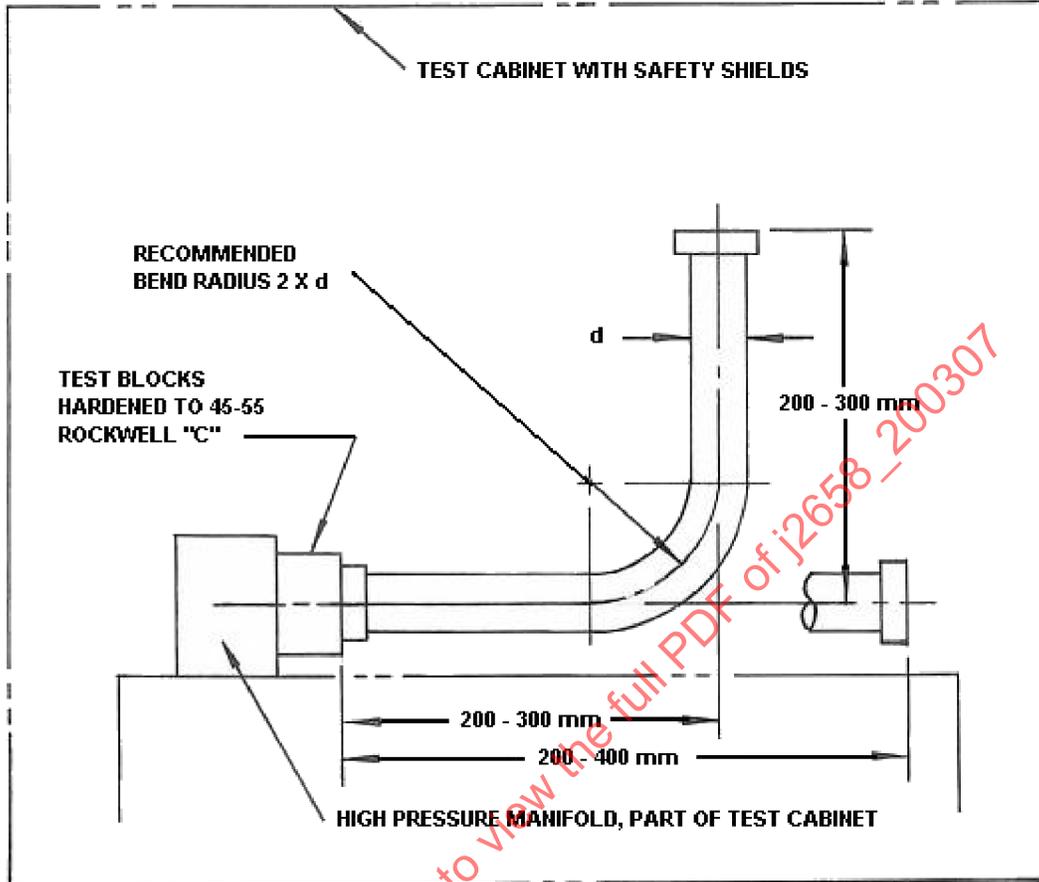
TYPICAL TUBE ASSEMBLY SAMPLES, TEST CONFIGURATIONS AND TEST CABINET SET UP
